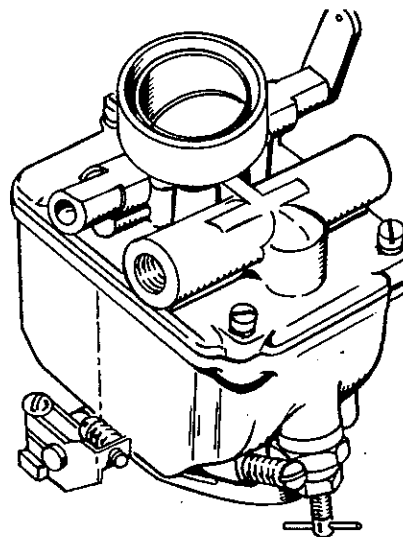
DOWN DRAFT TYPE CARBURETOR
